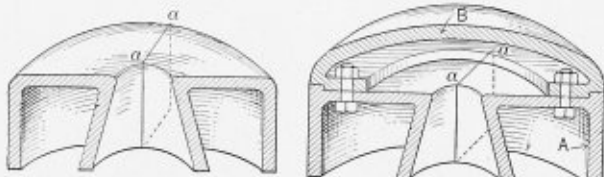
Section of Male Former for Flanged Heads. Fig. 2.—Section of Former for Bumped Heads
